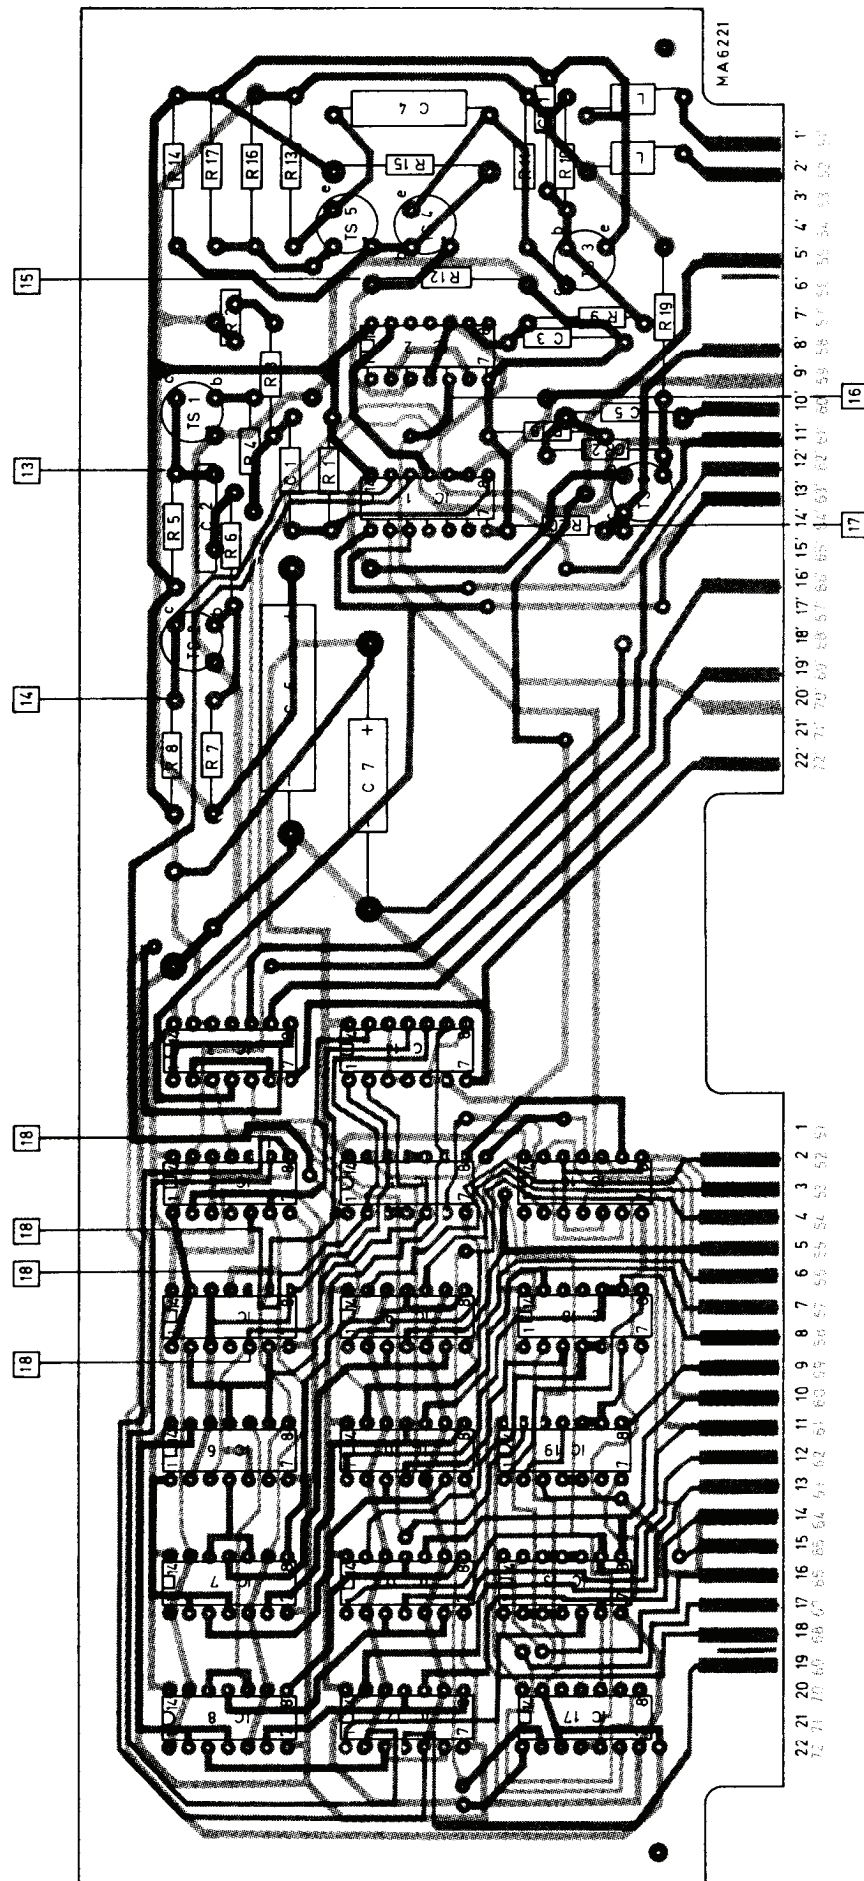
Printed wiring board, vertical decoder, unit 5
